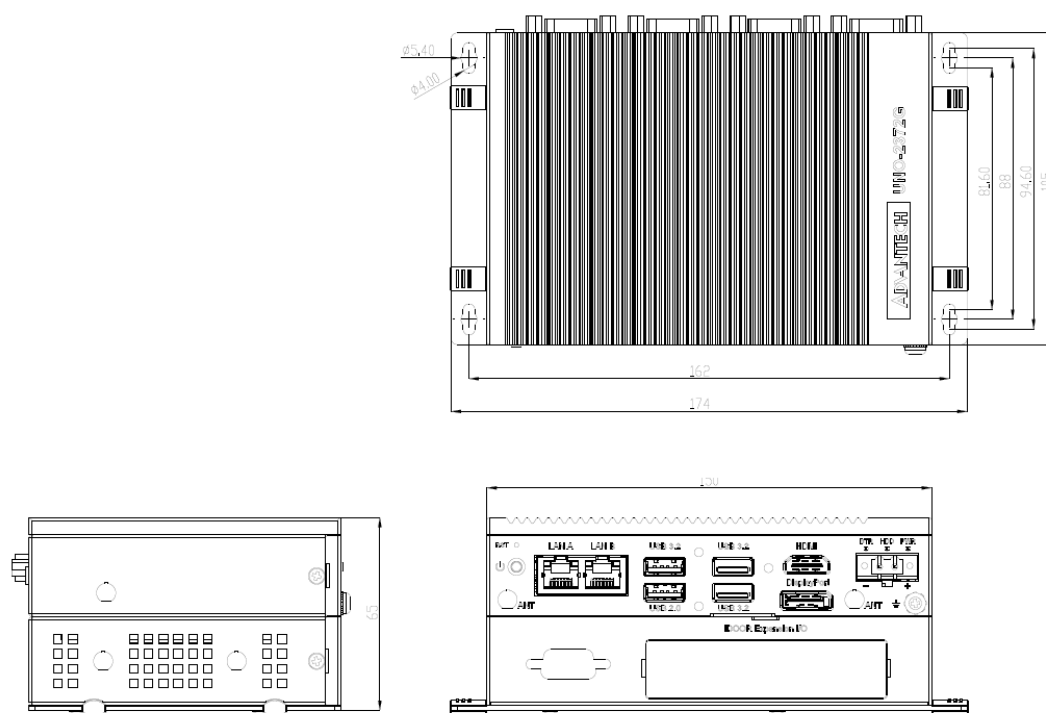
UNO-2372G V2 Dimensions (with Optional Extension Kit)
